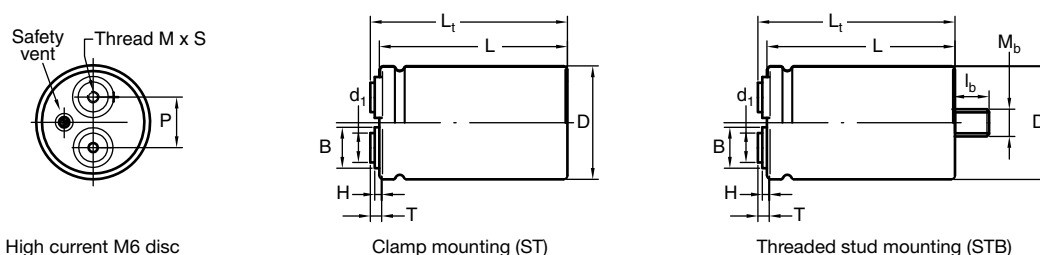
B - Mechanical drawings for high current M6 disc versions.
